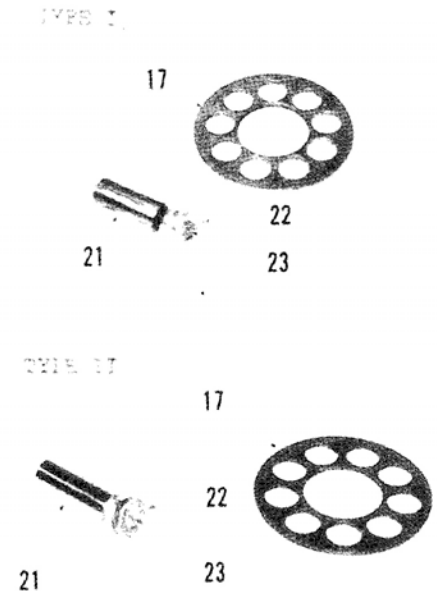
View showing Type I and Type II piston barrel (21), slipper (22), lubricant hole (23) and retainer plate (17).
